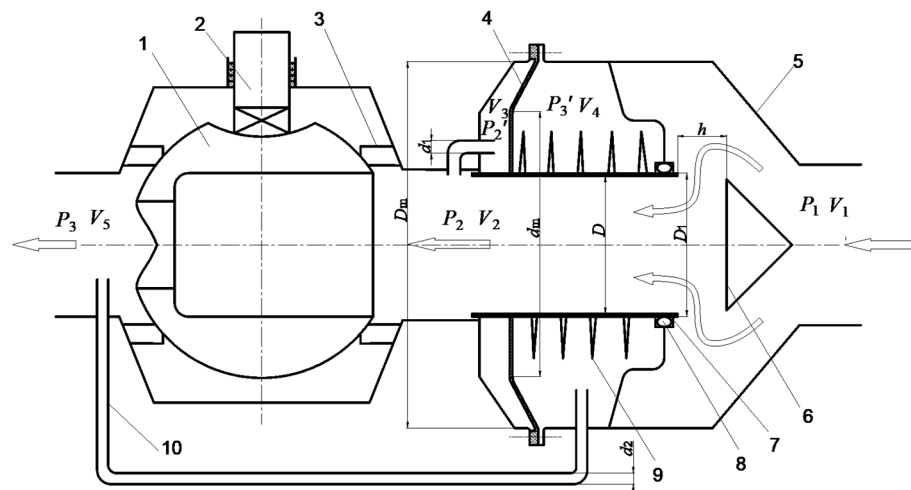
Schematic diagram of the structure of the dynamic flow balancing valve. 1. V-shaped ball core; 2. valve stem; 3. ball valve seat; 4. diaphragm; 5. valve body; 6. regulator valve seat; 7. pressure regulator valve core; 8. O-ring; 9. spring; 10. pressure guiding hole.
